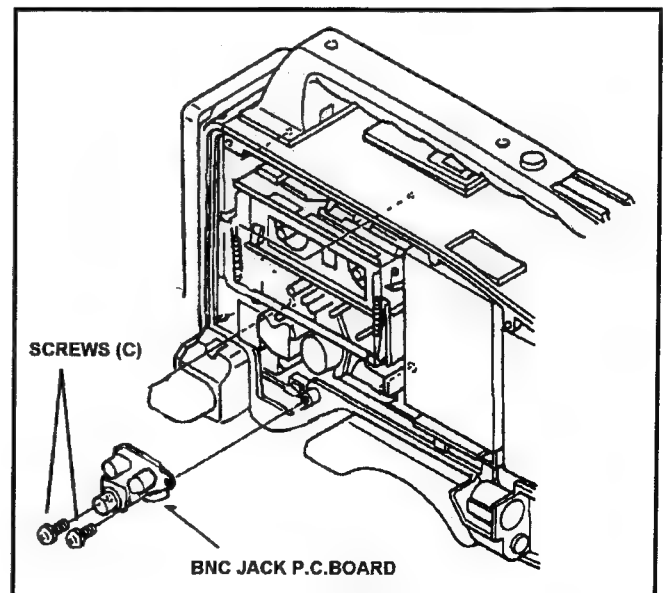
Removal of BNC JACK P.C.Board
